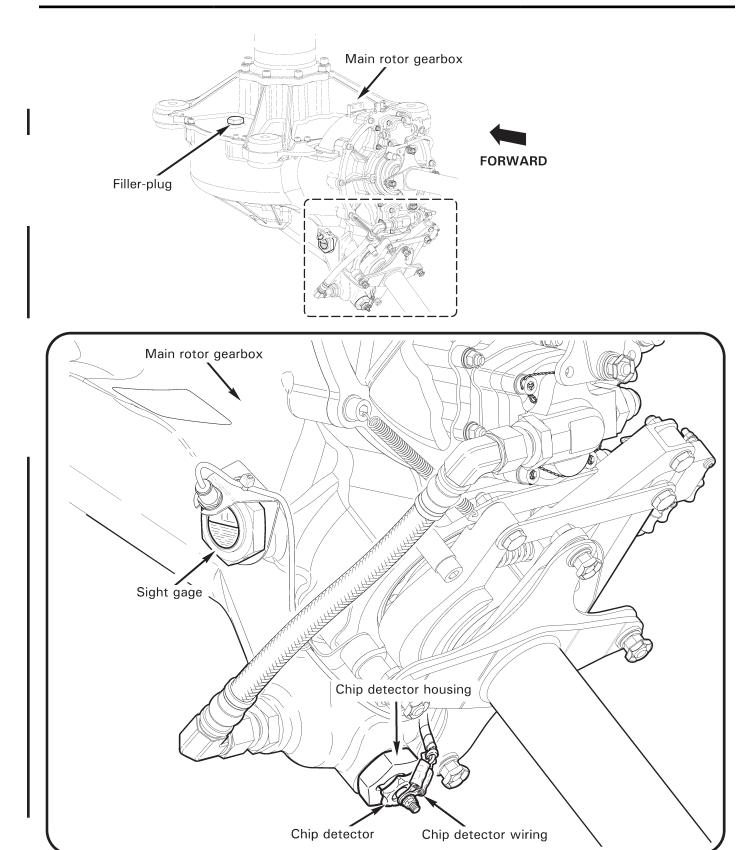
MAIN ROTOR GEARBOX SERVICING
